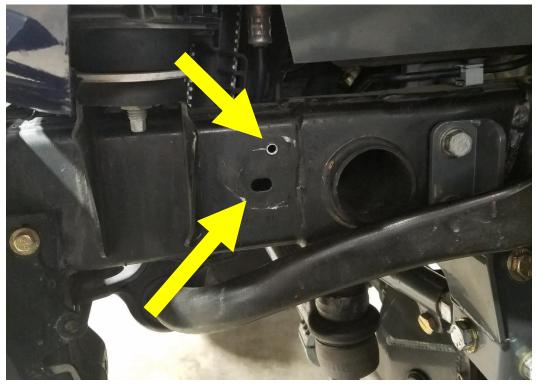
Disconnect Bracket Mounting Holes (Driver's Side)
